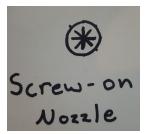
Nozzle Sketch Side View Figure 3: Nozzle Sketch Top View
